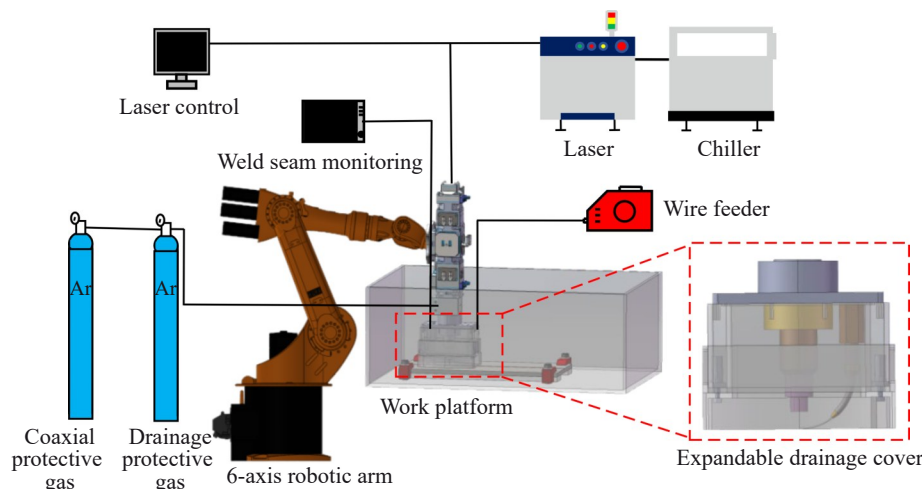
Schematic diagram of repair system of local dry underwater oscillating laser welding
